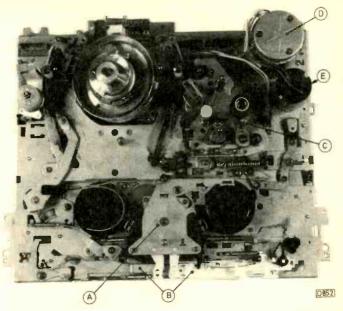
Upper deck with the cassette housing and head drum removed. The loading arms are in the half-laced position. Key: A forward/reverse drive idler assembly; B slide bars (operating levers); C reverse guide arm; D capstan motor; E loading motor.
